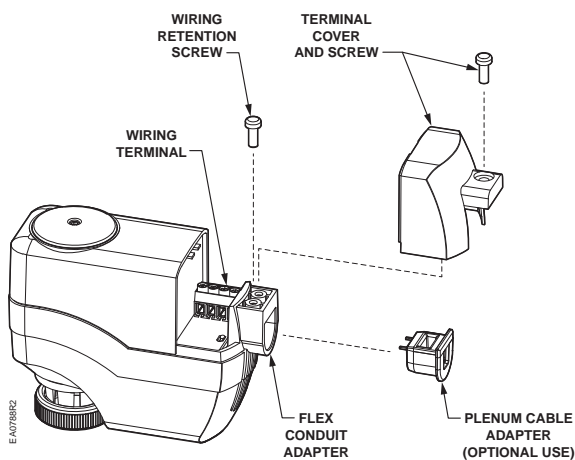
EN/ESZ3B2, EN/ESZ3C2 Actuator Components.
